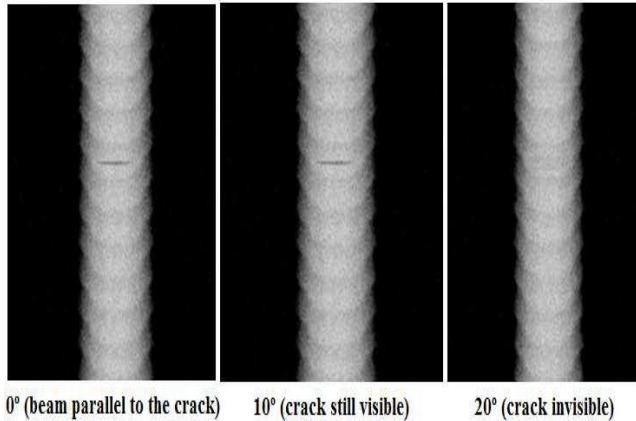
Detection of the welding cracks by radiography testing.
